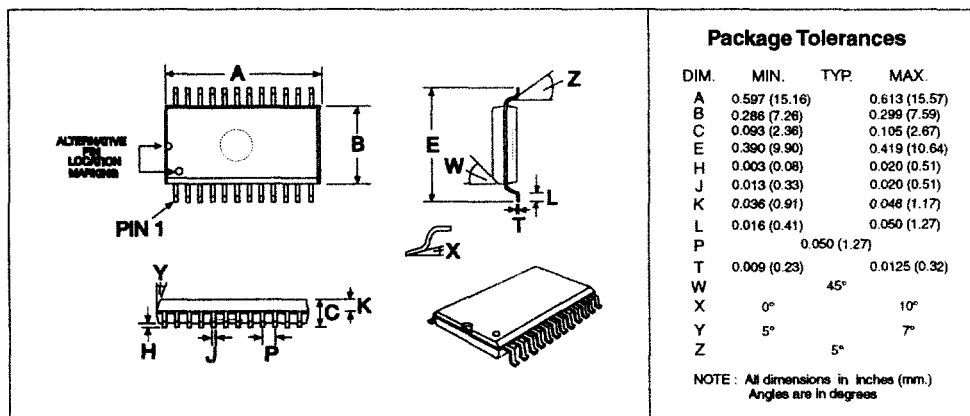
24-pin SOIC Mechanical Outline: Order as part no. MX818DW
